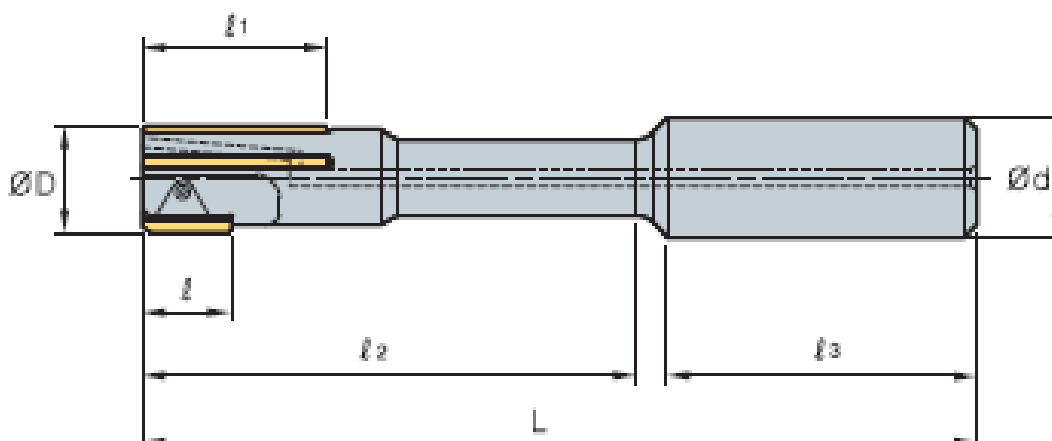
Assembled adjustable sweeper of the IRT and IRB series with mechanical attachment of replaceable plates of the company Korloy
